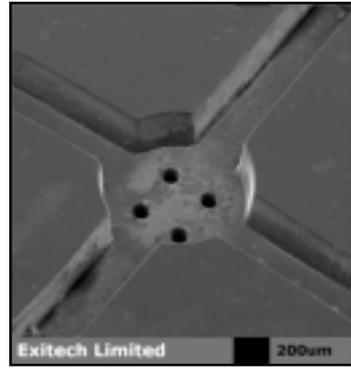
Nozzles machined in polyimide using multiple mask projection.
